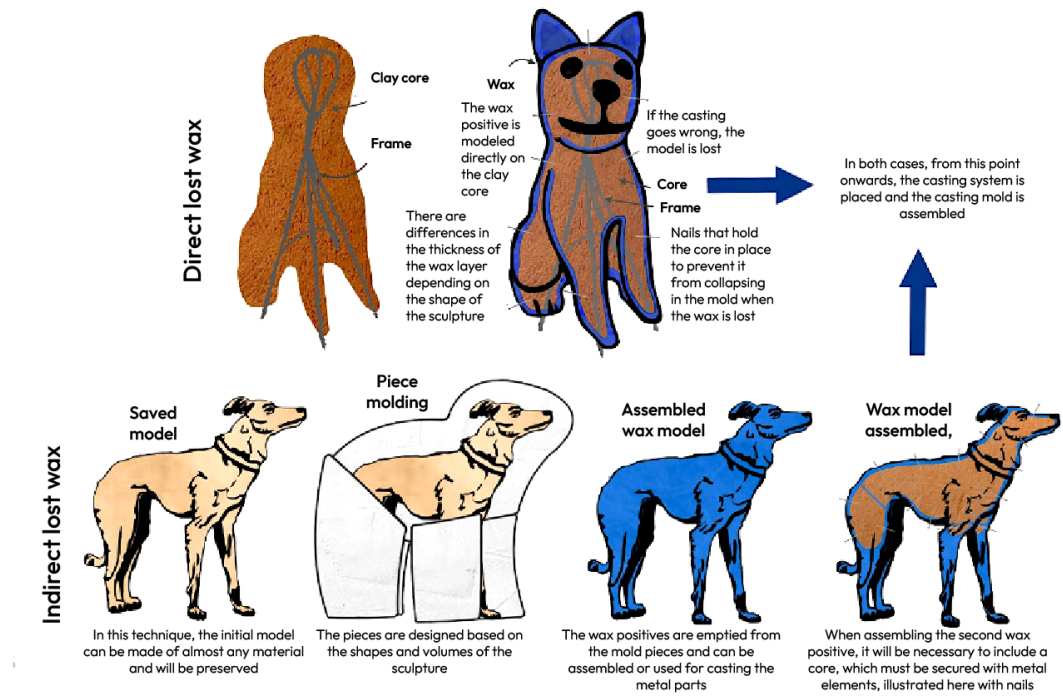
Comparison of casting techniques: above, direct lost-wax casting, in which the wax model is directly coated with a ceramic mold for casting; below, indirect lost-wax casting, which uses a piece mold to generate a new model that is coated with the ceramic mold, into which the liquid metal will be poured (Drawings: courtesy of the author).
